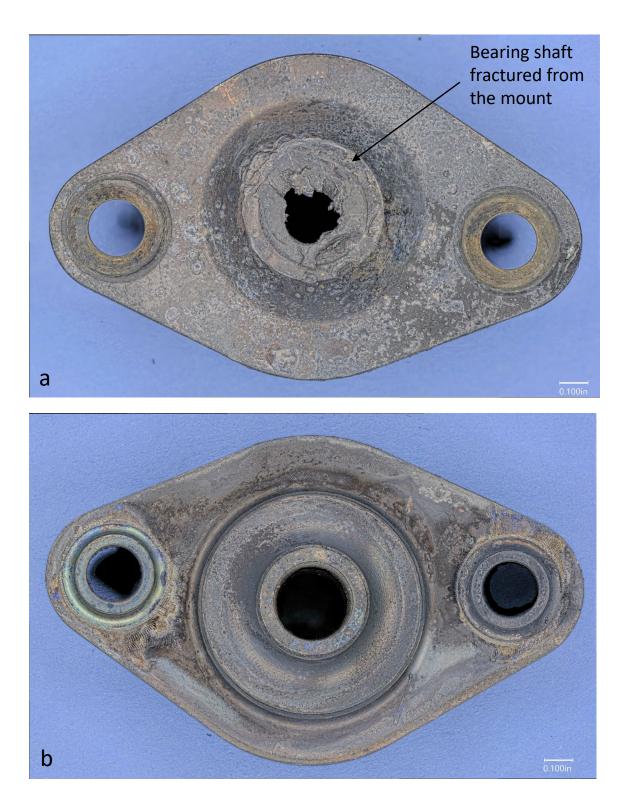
Digital microscope images of the Station 3 portion of tilt slde anti sag roller bearing mount, the separated shaft and bearing were not submitted.
